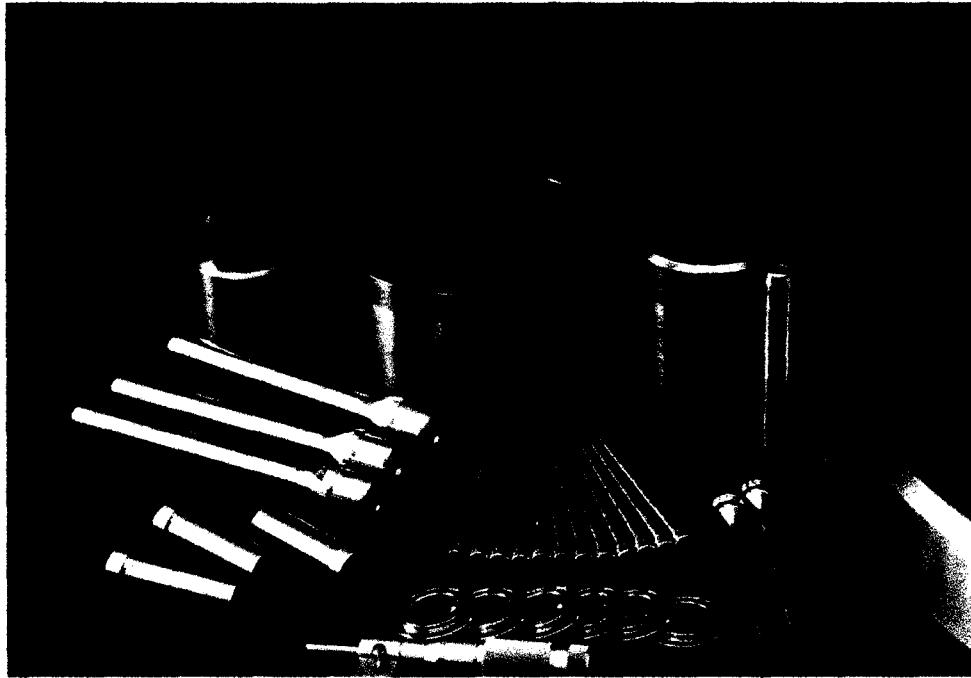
Examples of Aluminum to Steel, Titanium to Aluminum, and Titanium to Stainless Steel Tubular Transition Joints Machined from Explosion Clad Plate (Explosion Fabricators, Inc. photograph)
